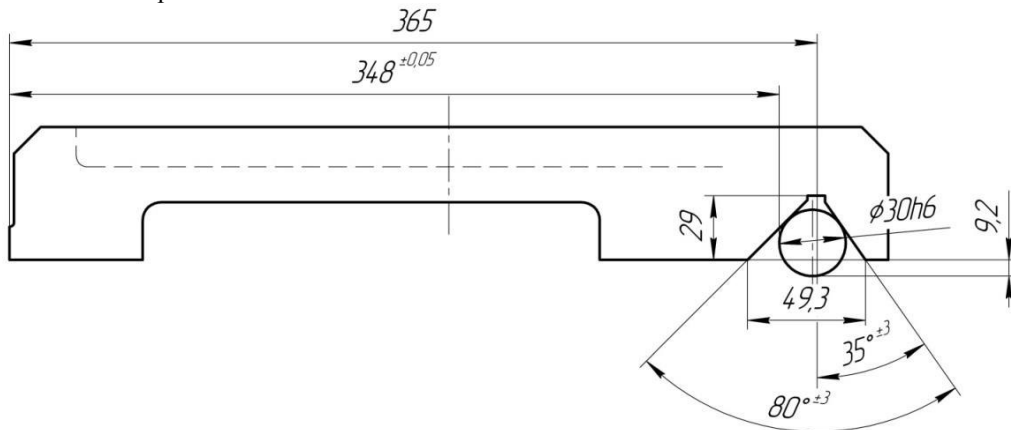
Template for the manufacture of the body guide of NT-250I machine for the supports
